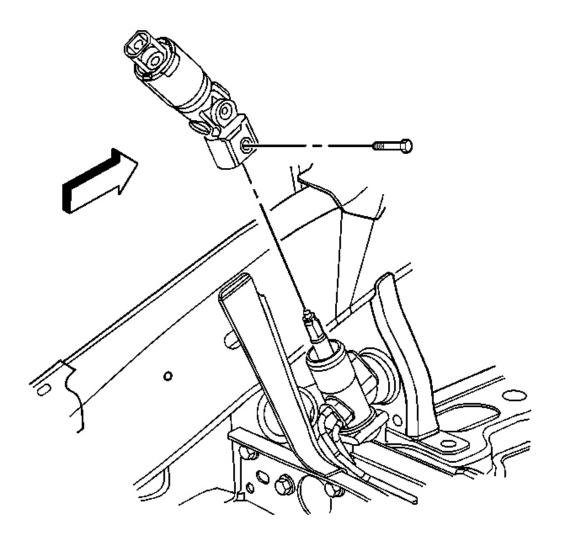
Removing/Installing Lower Intermediate Shaft Courtesy of GENERAL MOTORS CORP.
